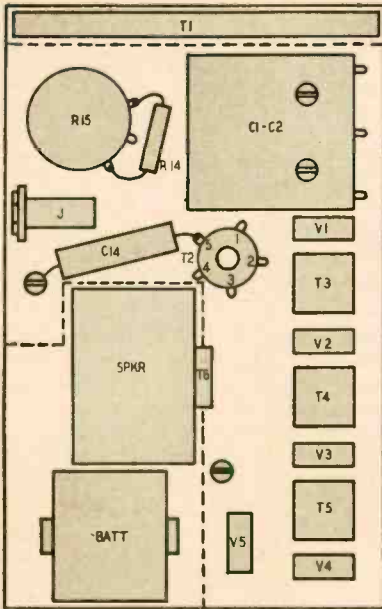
Parts layout on the chassis board indicating holes cut in chassis. speaker and tighten the spacers on them. The speaker frame is already drilled for holes, but these will have to be slightly enlarged to accommodate 6-32 screws. Now apply heat and solder at points A so that the spacers remain firmly in place after the screws are withdrawn. When the set is finished, these screws will be used to hold the chassis and speaker in the case.
